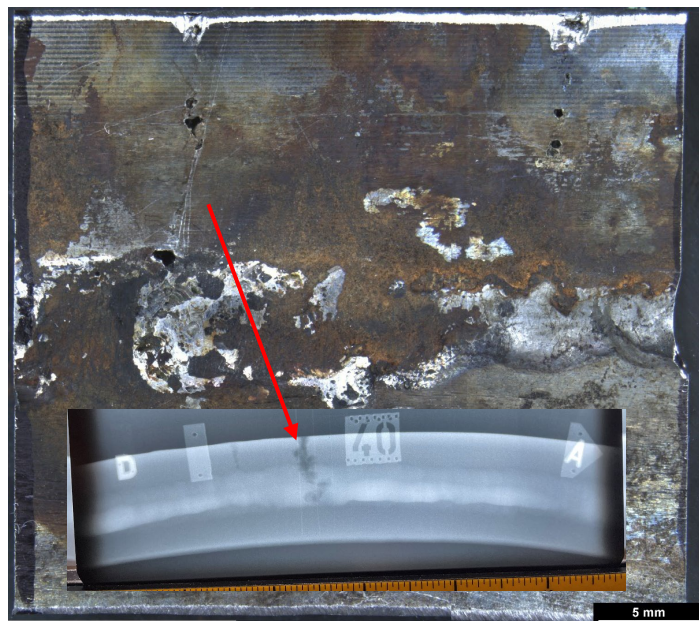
Detail of the inner surface weld with cavities, PS2 specimen with radiographic image of the outer surface.
